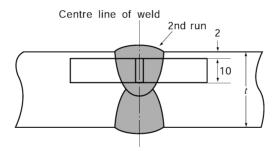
Position of impact Test Specimen for Butt Weld Test Assembly with Two-Run Technique (Unit: mm, t: plate thickness)
